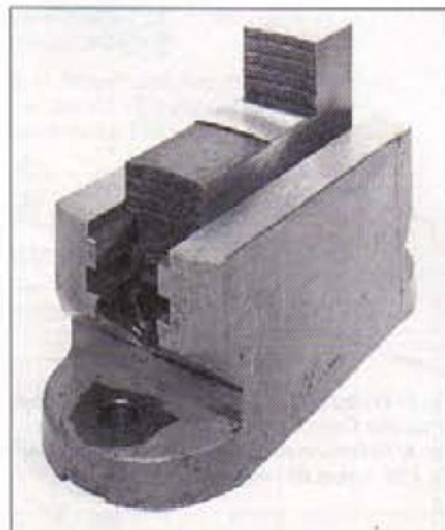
A selection of separate jaws for bolting on to the lathe faceplate to form a primitive four jaw chuck.
